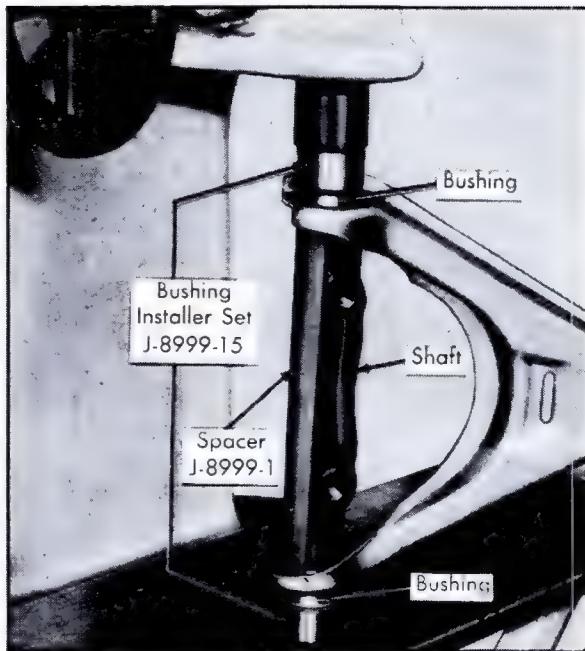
Installing Shaft and Bushing In Upper Arm
